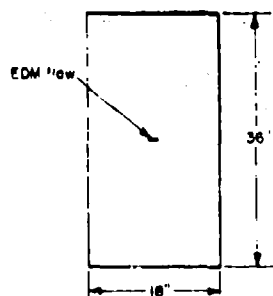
SHEET FRACTURE TOUGHNESS SPECIMEN
